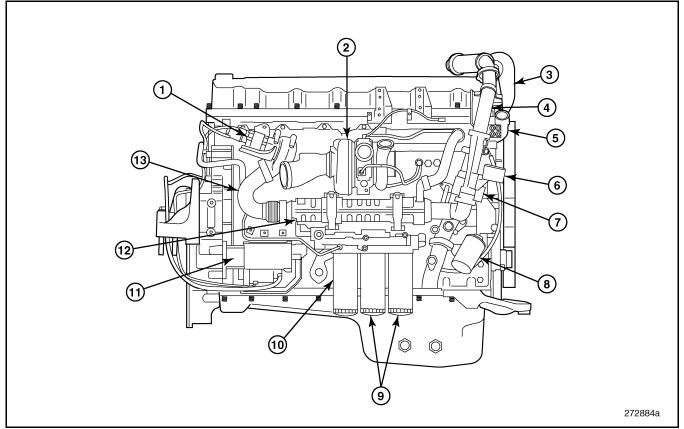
MACK MP8 Euro 4 Engine, Right-Side View (Front >), Conventional Chassis
